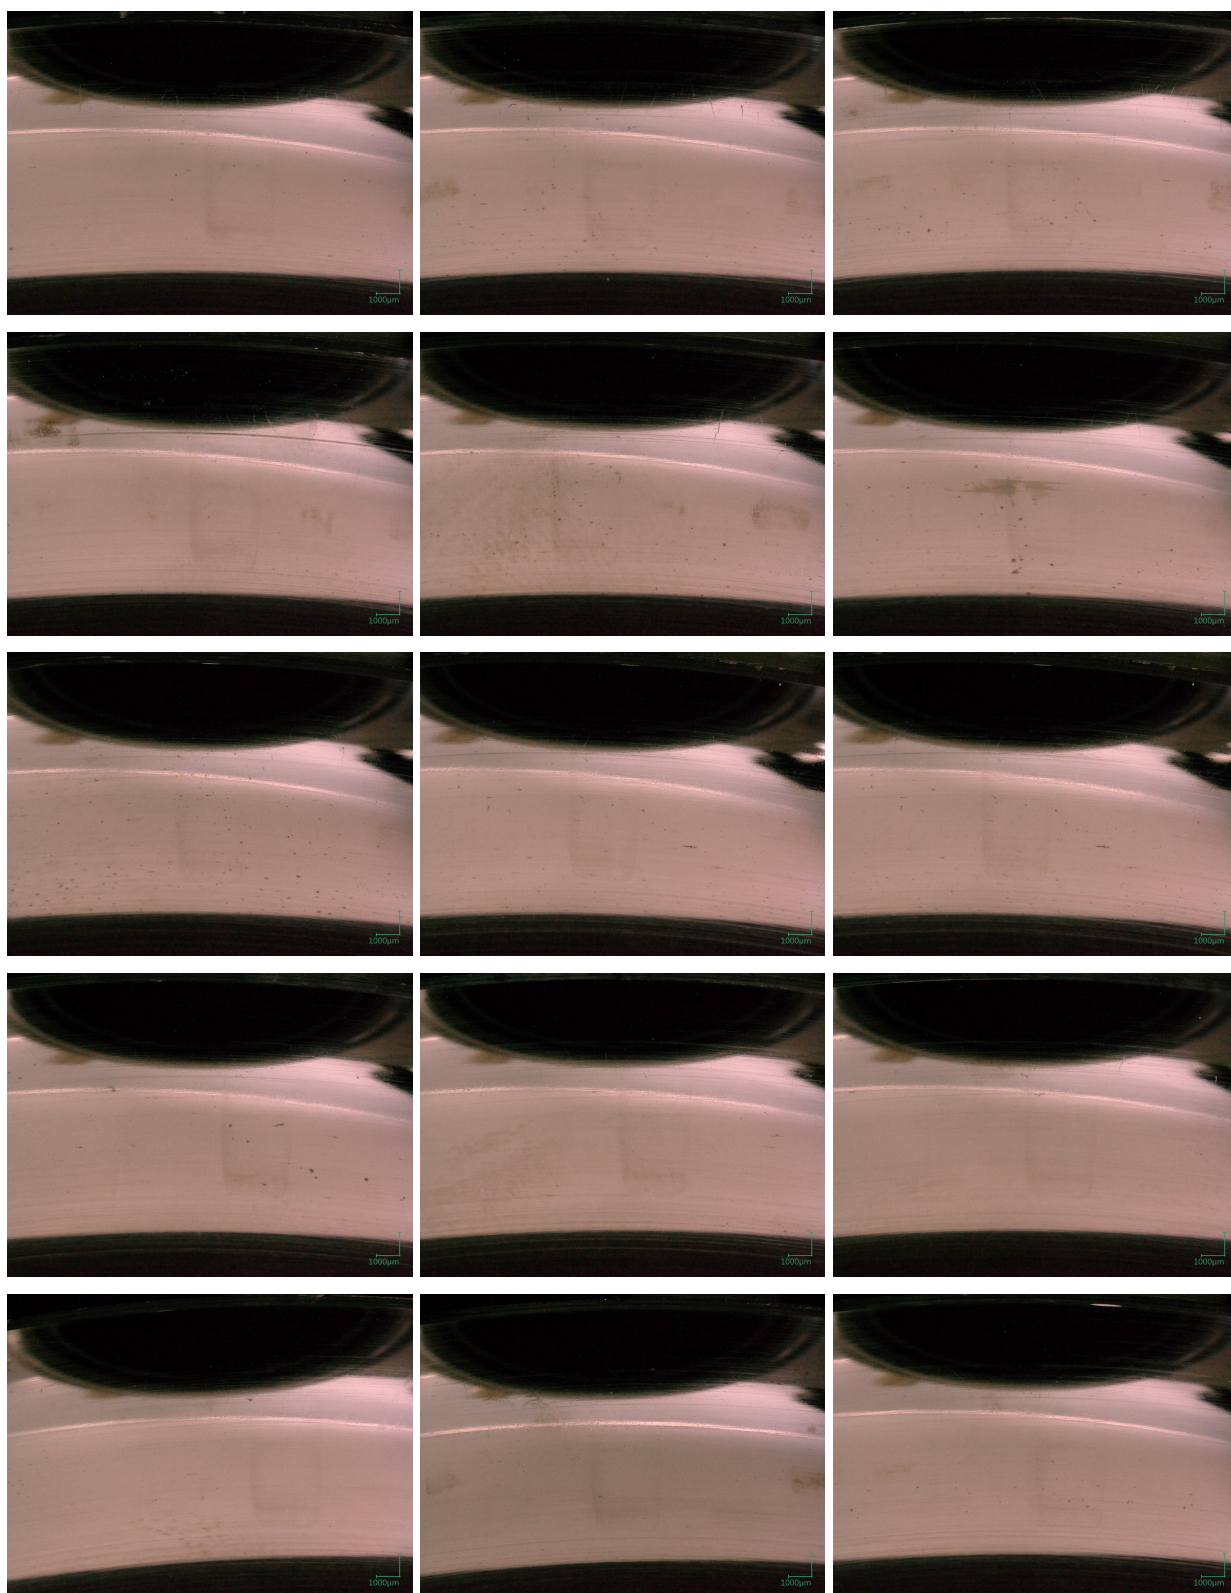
Raceway condition inner ring, Test ID 8, Bearing ID 0017
